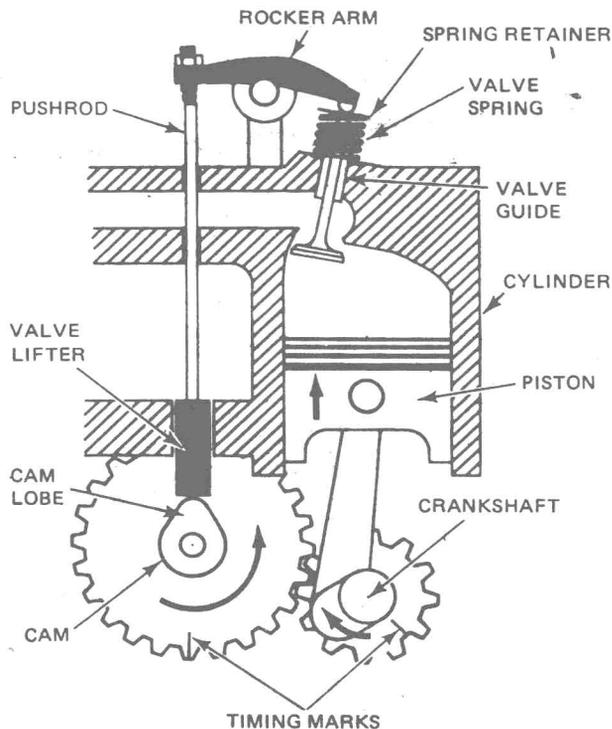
Valve train on an engine using a pair of gears to drive the camshaft. The cam lobe has pushed the push-rod up so that the valve is opened.
